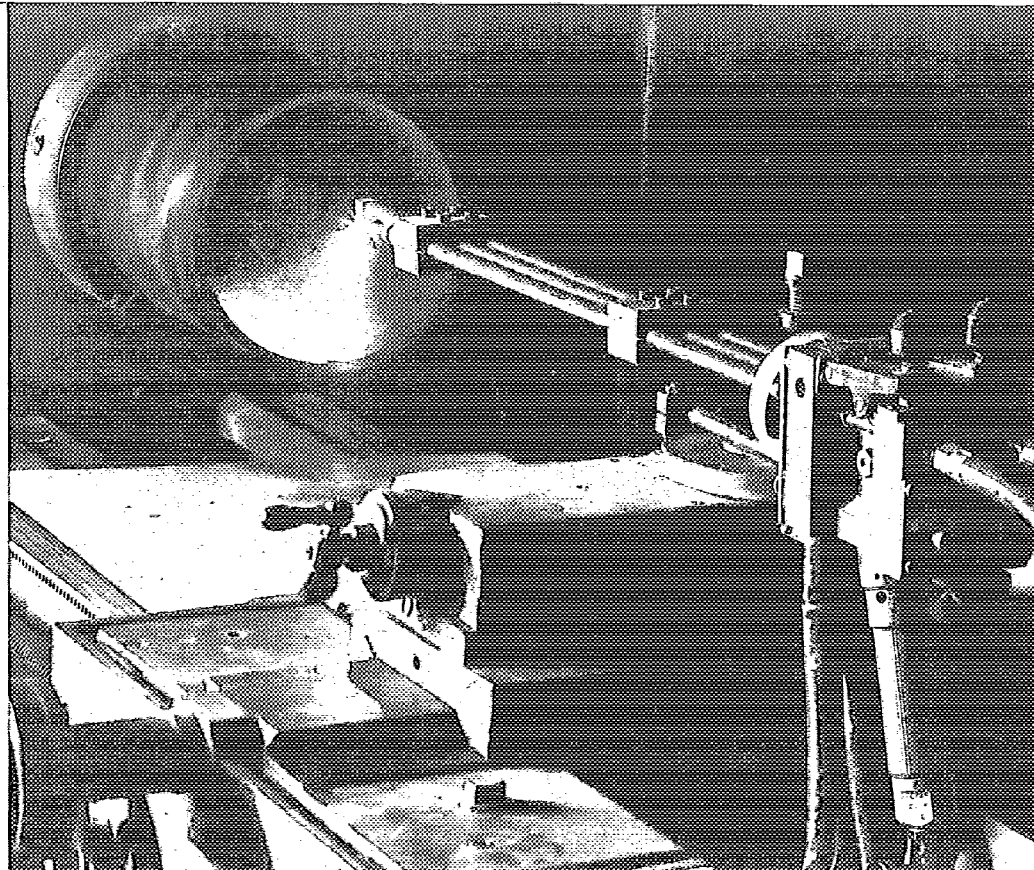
A — Use of a lathe to manipulate the part and the gun for spraying the inside surface of a cylinder
